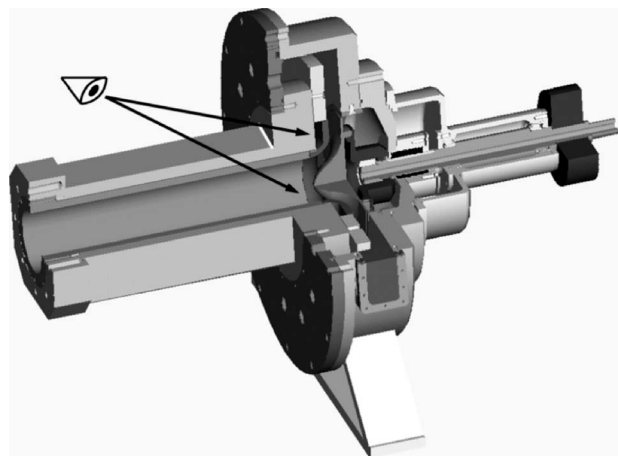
Cross-section through the pump installation with noted view point of cameras
